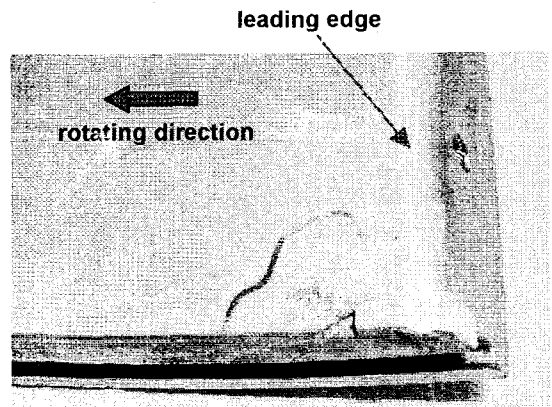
Spragging of upper unloaded pad of tilting pad journal bearing
